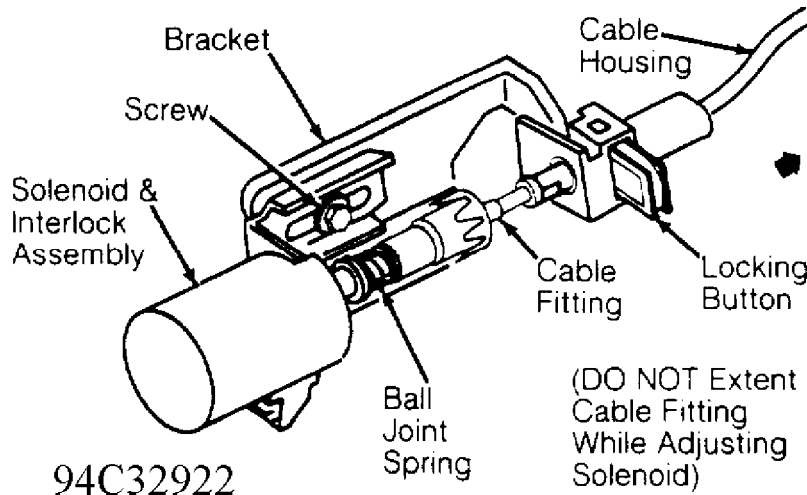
Adjusting Solenoid & Interlock Assembly (In-Vehicle)
